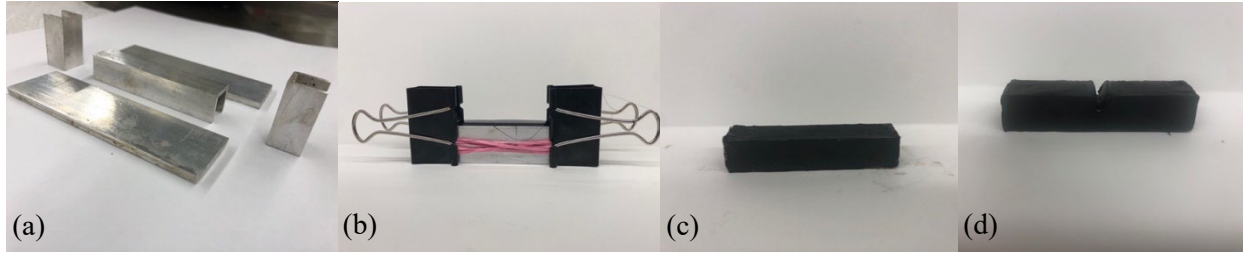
Izod test beam preparation (a) pieces of fabricated aluminum mold; (b) assembled mold; (c) test beam; (d) test beam with notch
